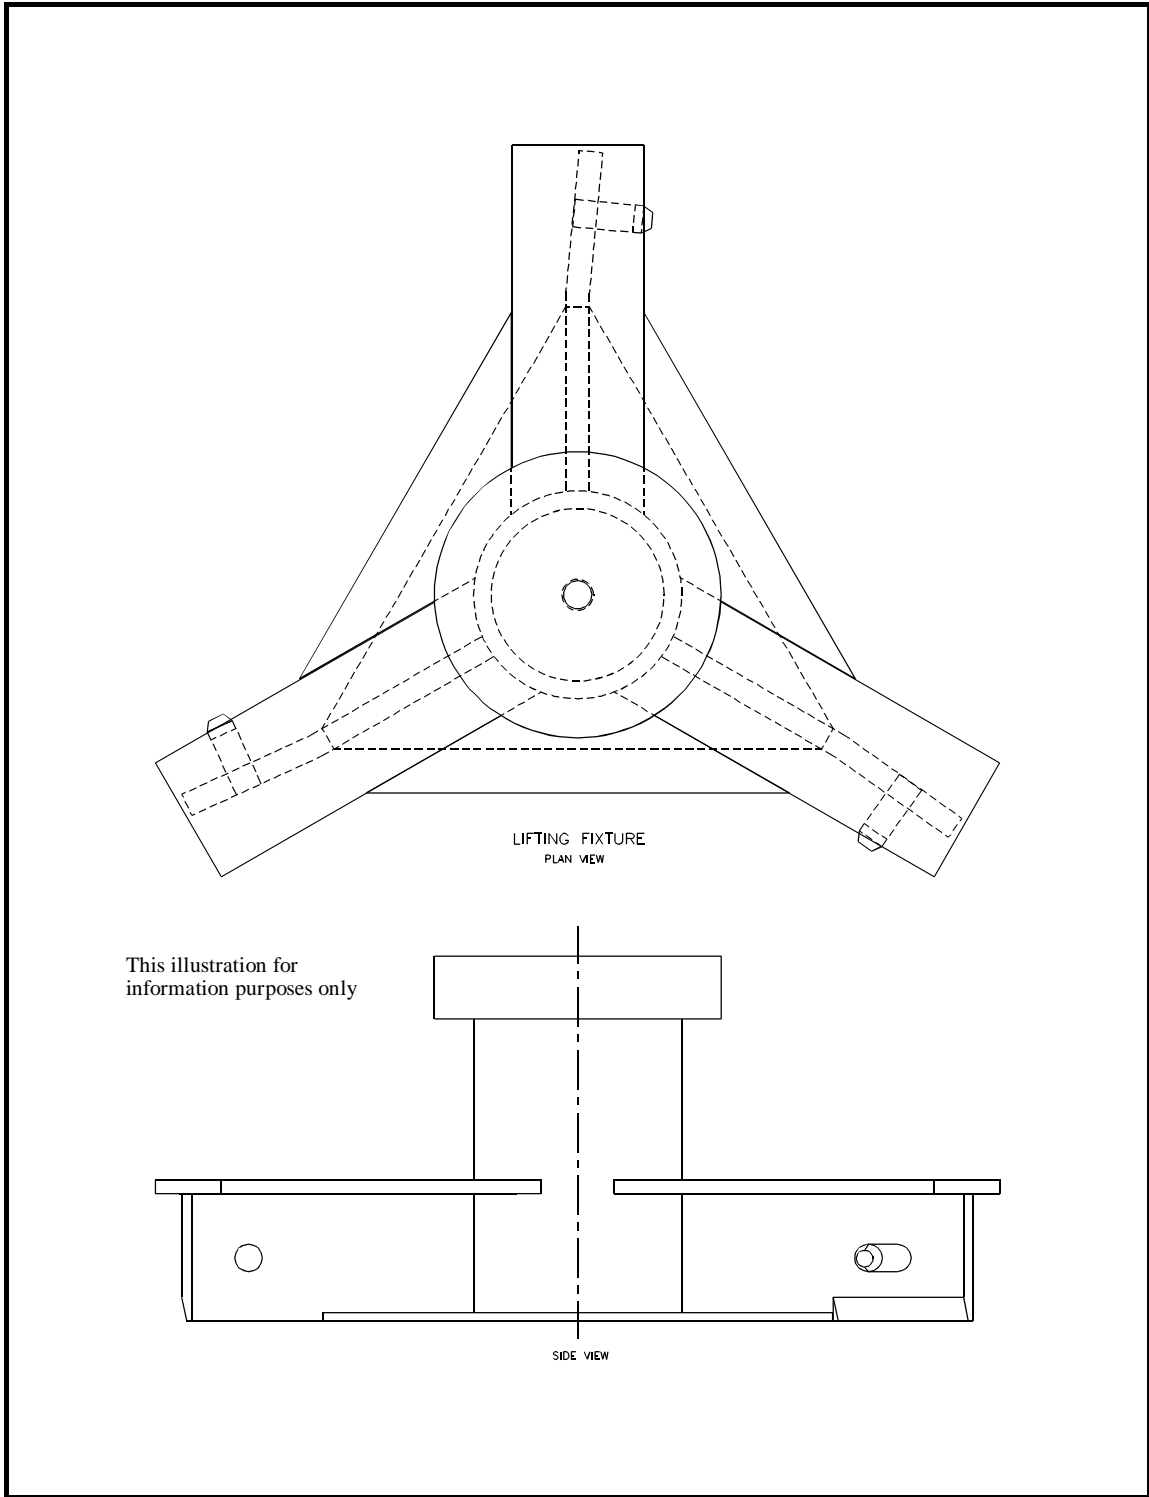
10-160B Cask Lid Lifting Fixture
